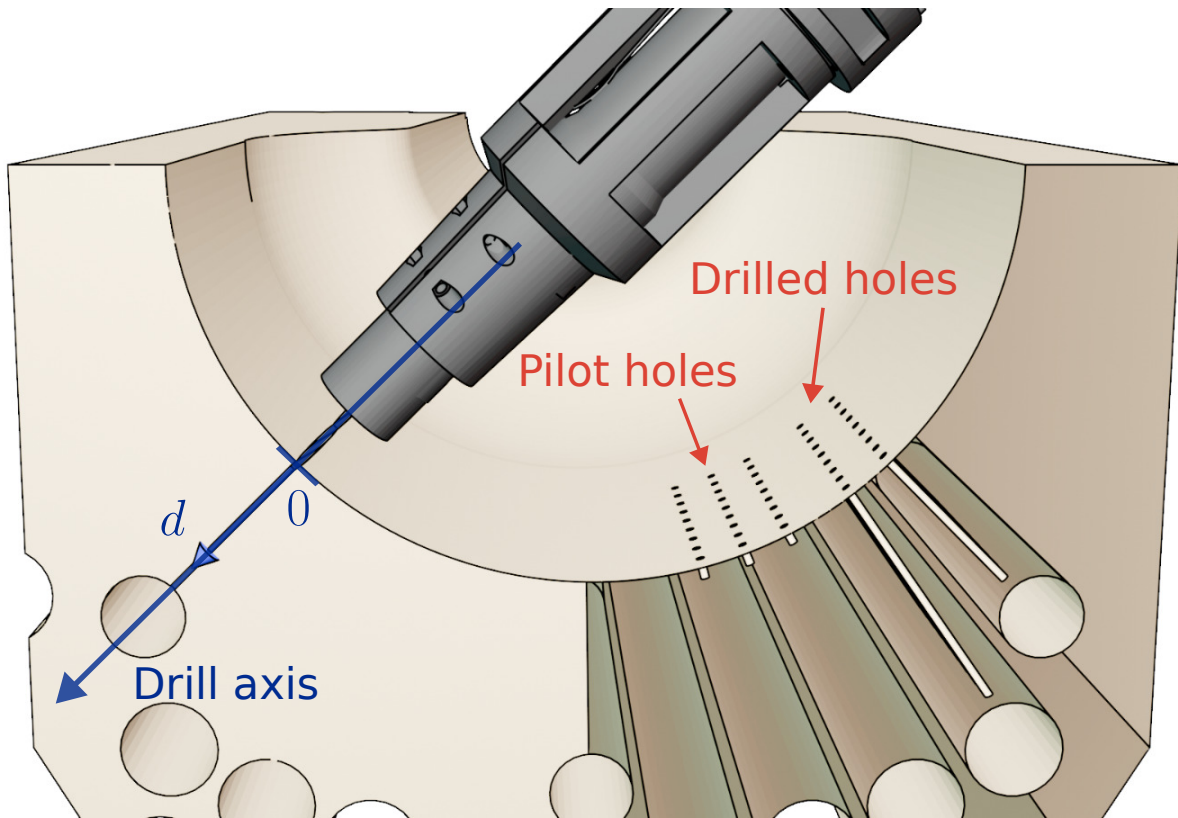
Visualizing the deep-micro-hole drilling process within a mould utilized in glass container manufacturing. Initially, a rigid drill is employed for piloting, followed by the placement of a high-speed-steel drill in the pilot hole to proceed with the deep-micro-drilling along the drilling axis.
